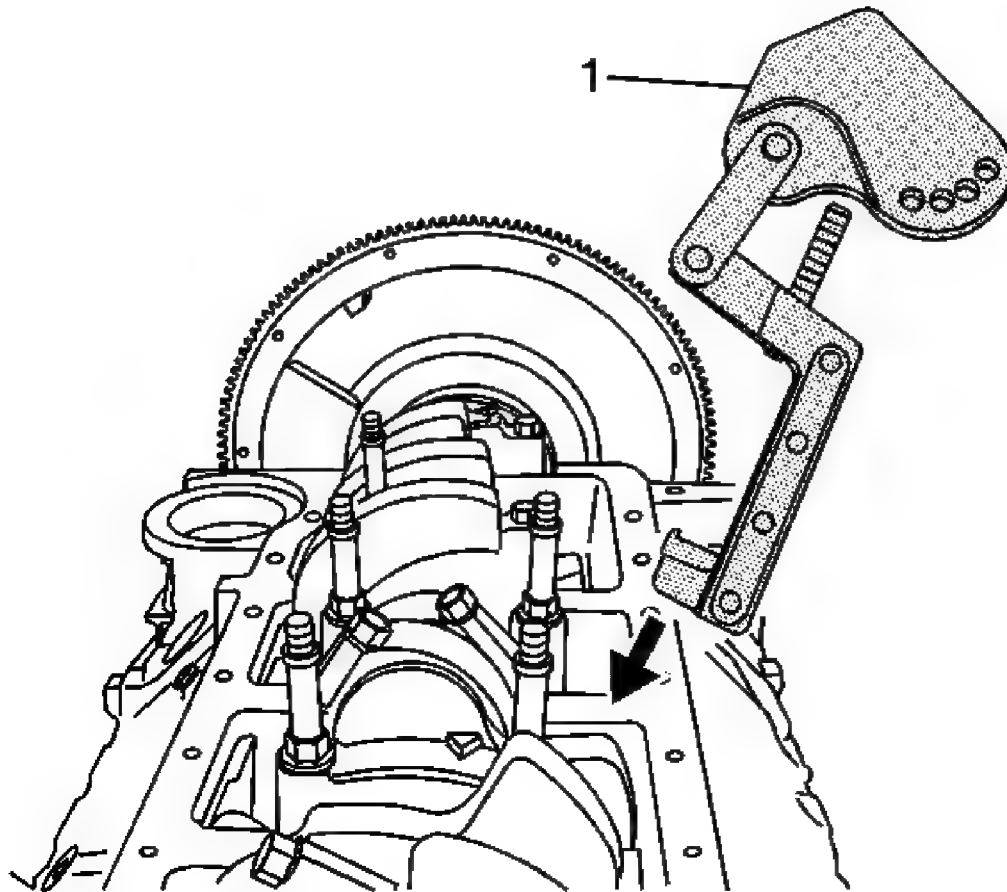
Installing Pivot Arm Assembly Onto Connecting Rod
